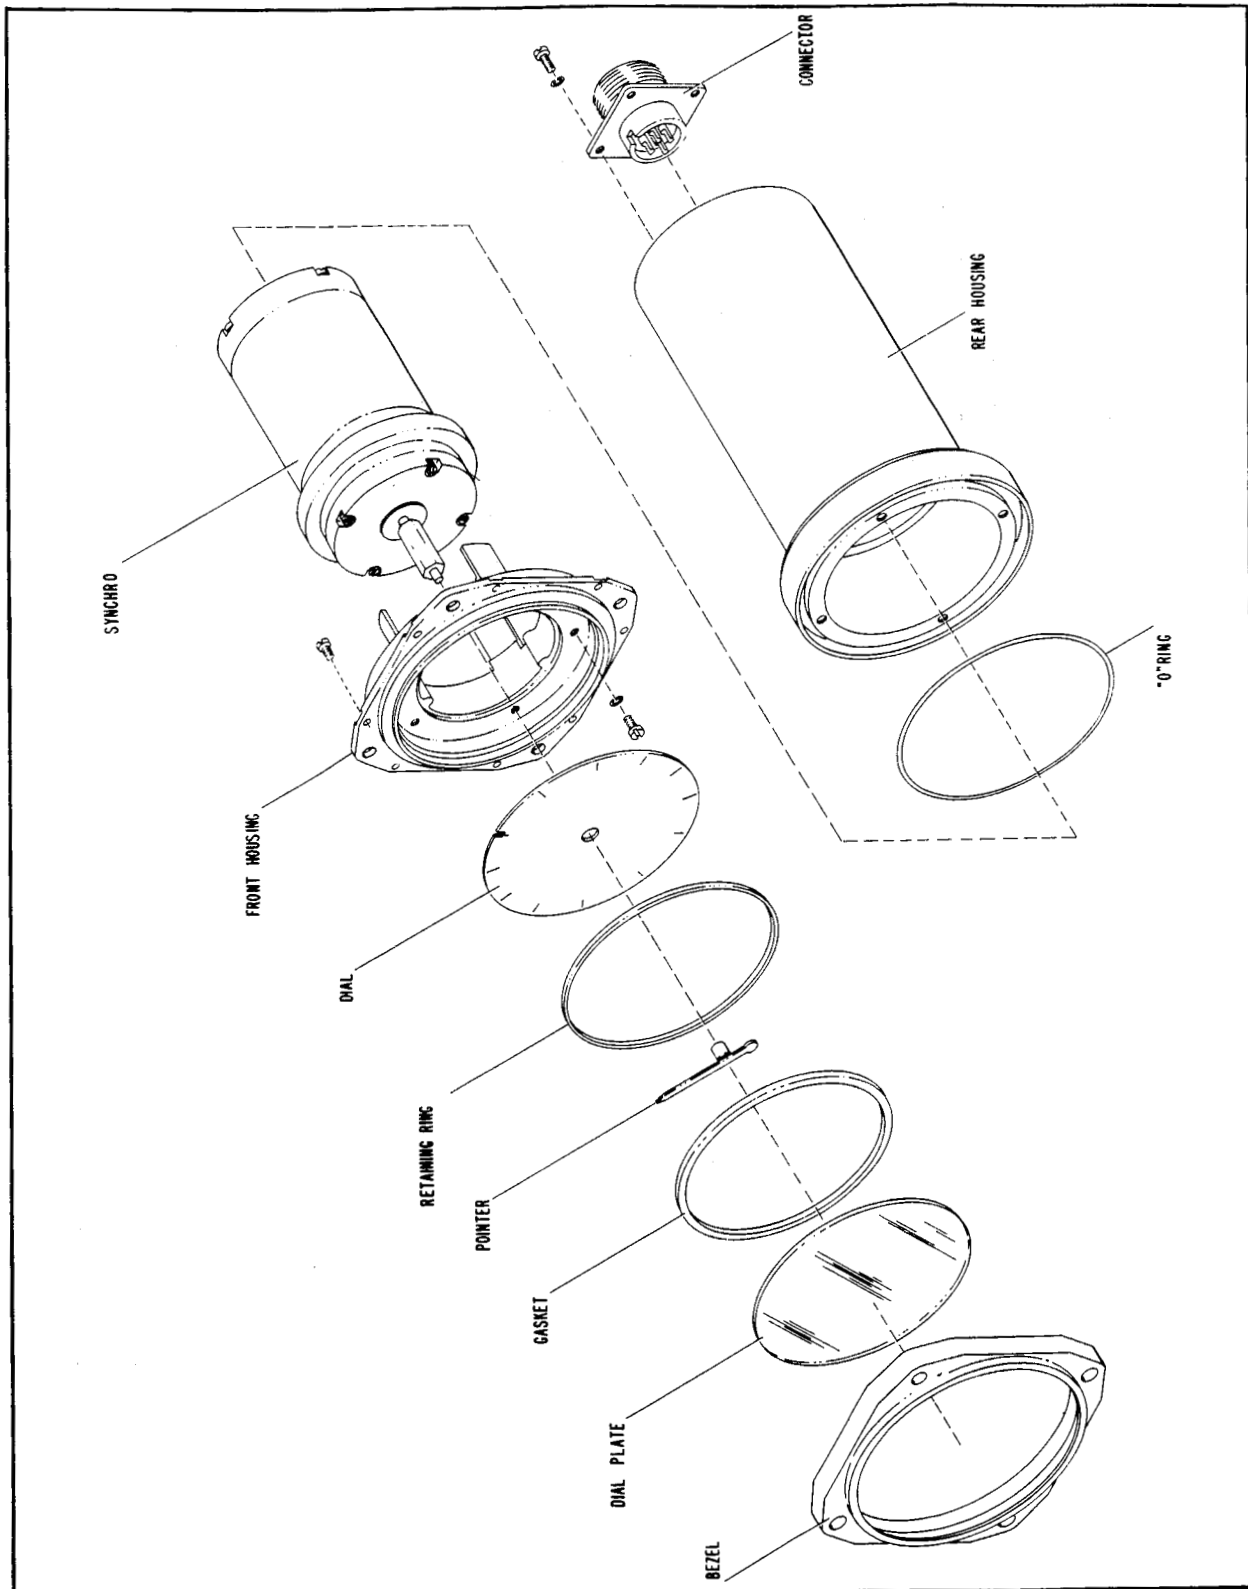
Acquisition Data Console Synchro Receiver or Differential Receiver, Exploded View
